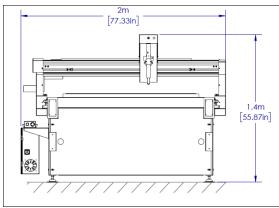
Dimensions of the machine itself, as viewed from the front.
